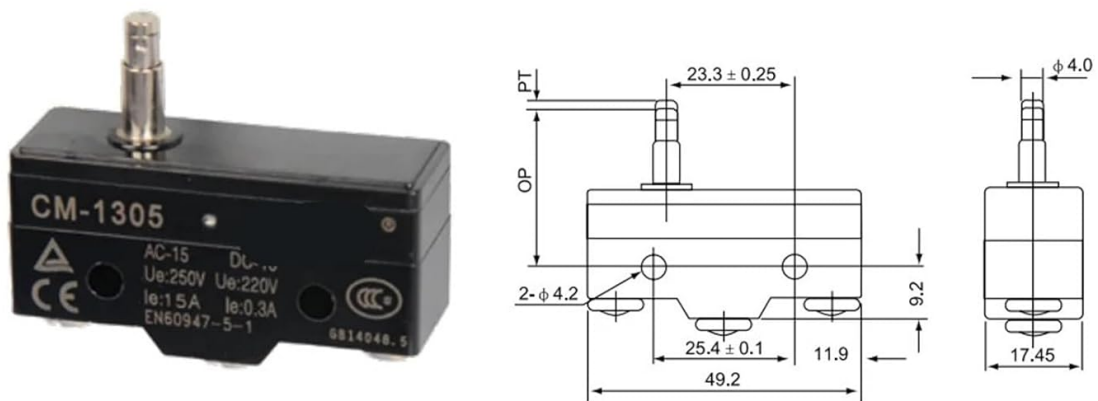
DMBGRXJF CM-1305 Miniature Micro Limit Switch with detailed dimensional drawings. This image displays the switch from a front view, a side view with key measurements in millimeters, and a top-down view, providing essential information for precise mounting and integration.
